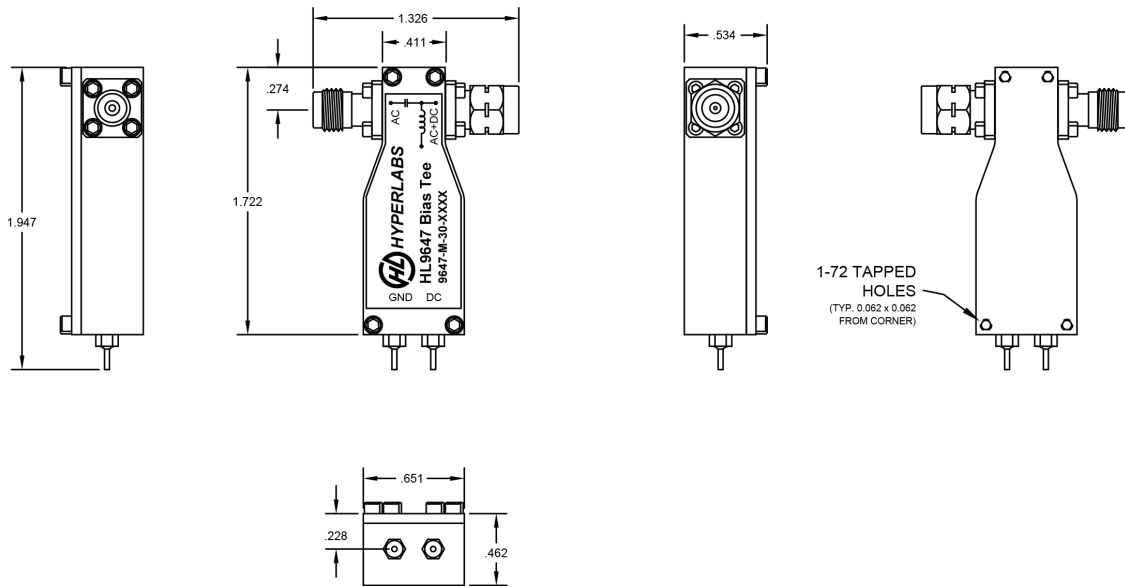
HL9647 with DC bias pins Mechanical Drawing
